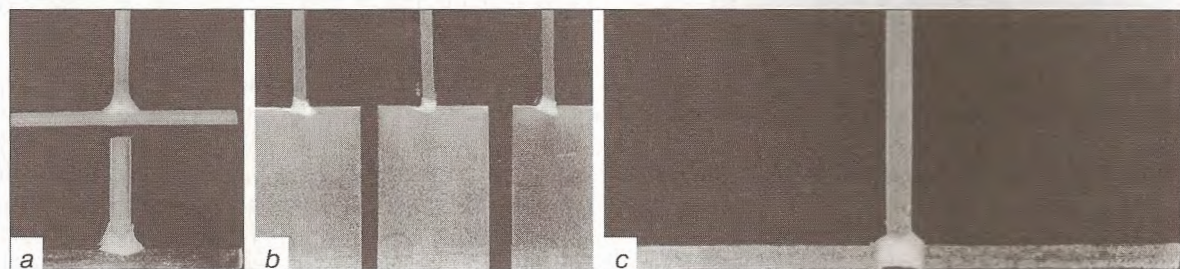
Macrosections of T-joints of aluminium alloys: *a* — double-sided weld on alloy 1430 with 2.8 mm thickness of elements; *b* — single-sided weld on alloy 1423 with 1.8 and 35.0 mm thickness of elements; *c* — slot weld on alloy D16 with 2.4 mm thickness of elements
